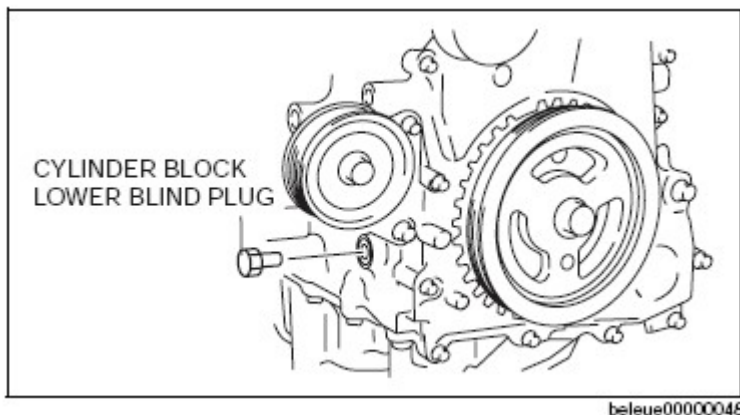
Identifying Cylinder Block Lower Blind Plug
